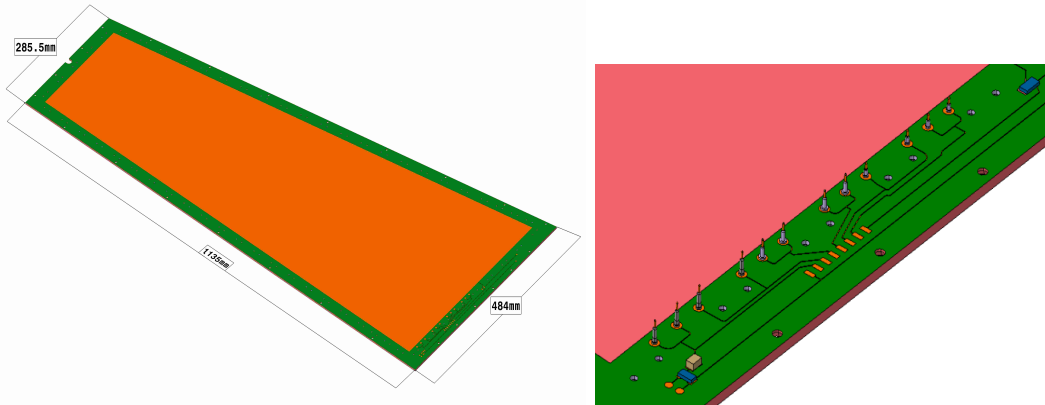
(left) Design of GE1/1 drift board and (right) magnified view of the design of the wider side of the drift board, with the twelve HV pins and corresponding soldering pads for the resistive divider network. There are on-board HV circuit traces and pads for the spring-loaded pins that make the electrical connections to the GEM foils; the pads for a 10 M Ω SMD resistor, 100 k Ω and 330 pF capacitor; the holes to fix pull-outs against the board [17].
